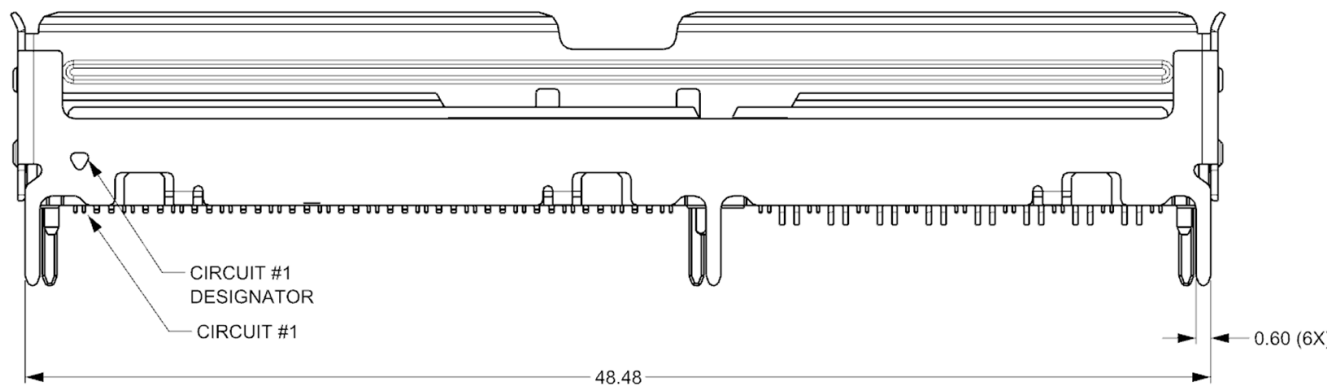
124-Pin Front View of Fixed-Side Connector Cage
